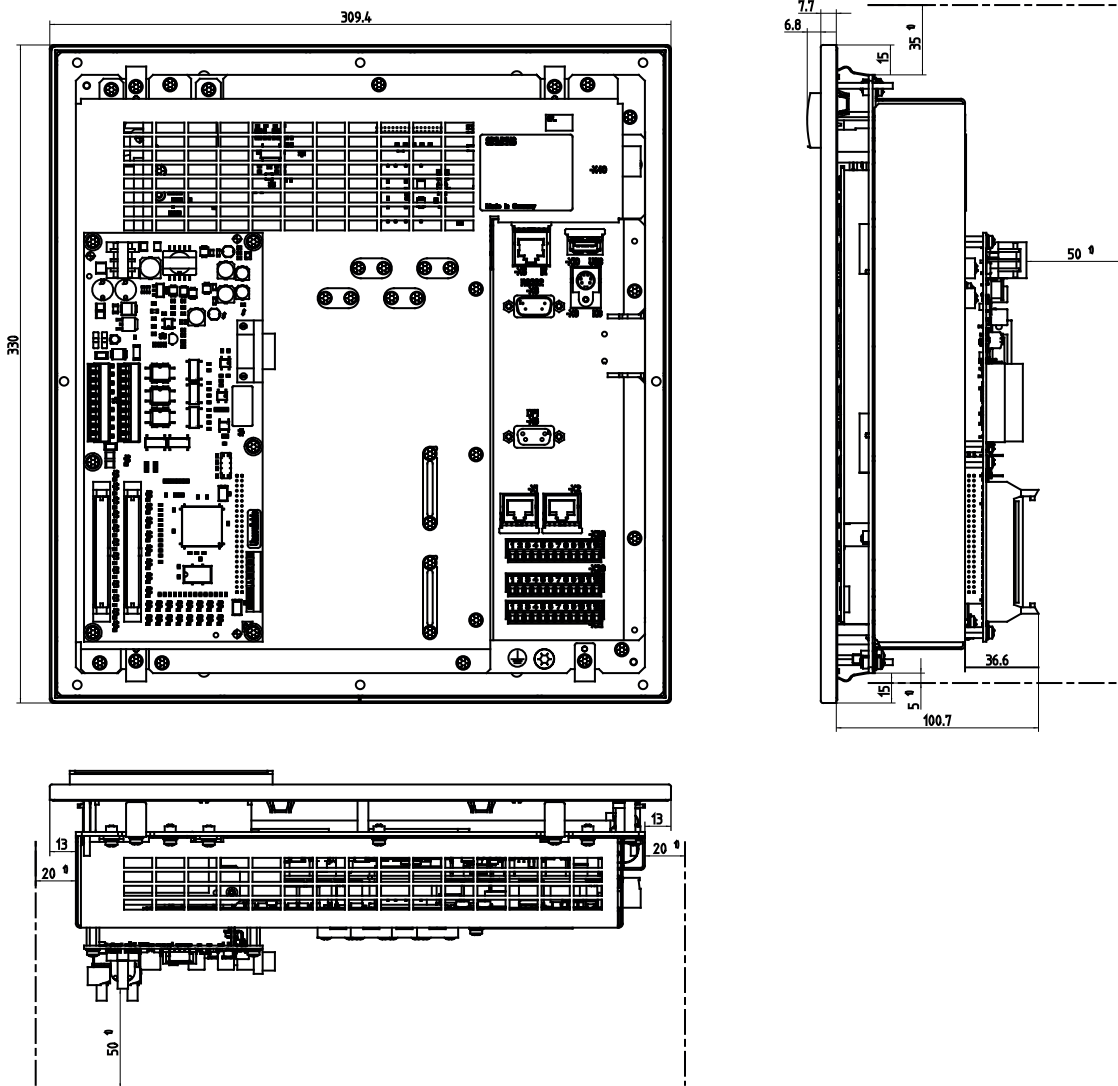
Dimensional drawing CNC operator panel with MCPA module
